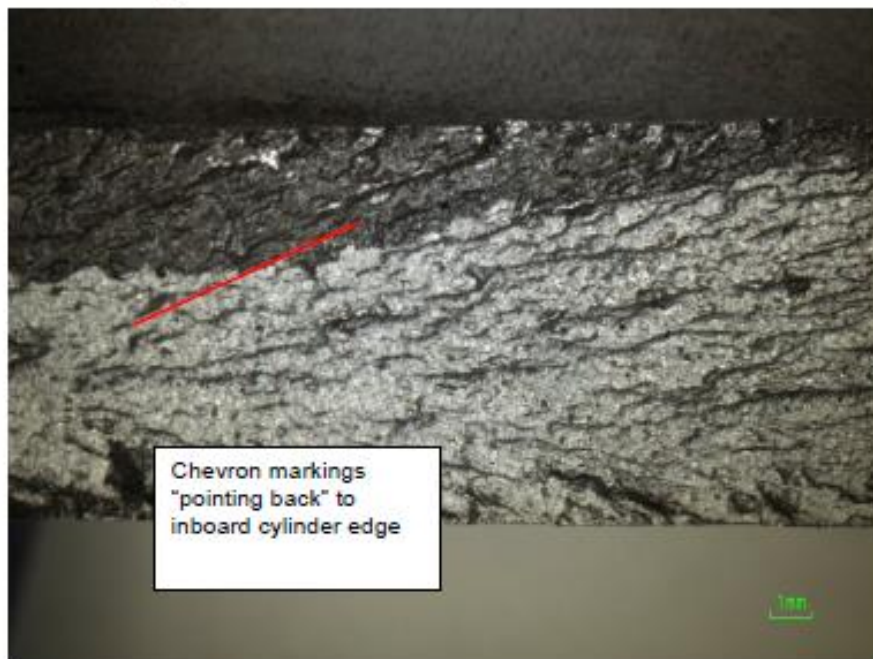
Showing the markings present upon fracture surface 'B2'.
